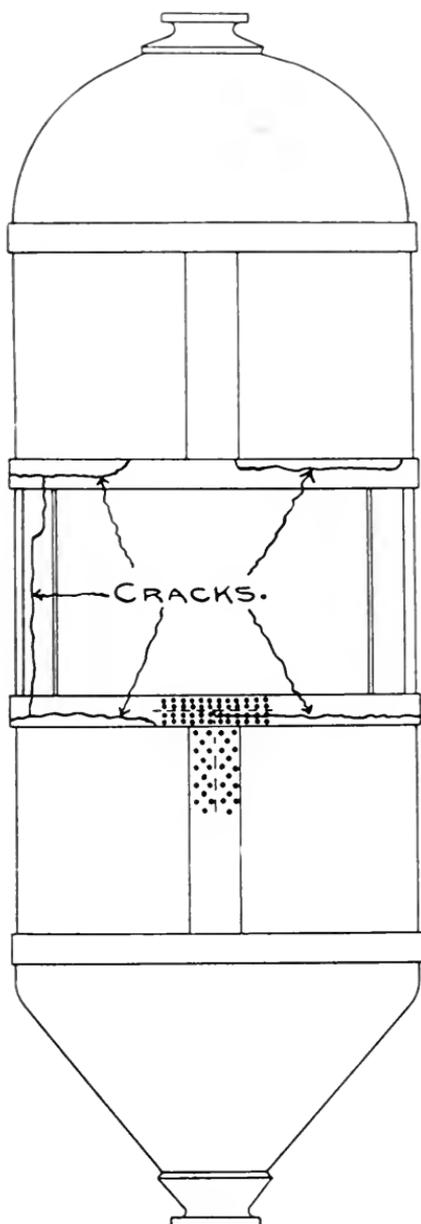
ELEVATION OF DIGESTER SHOWING LOCATION OF THE LINES OF FAILURE.
